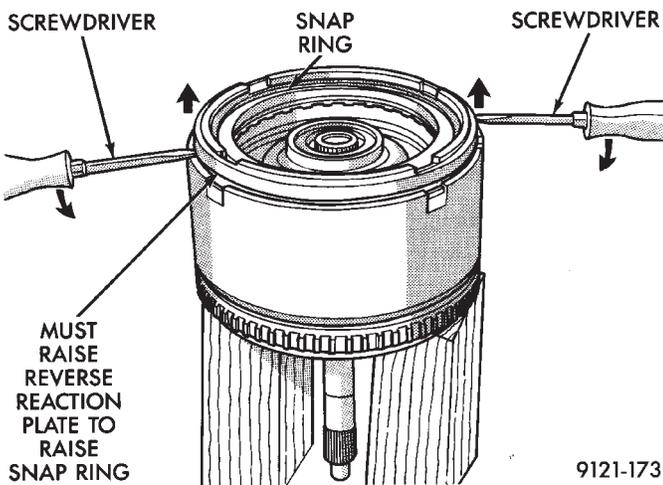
Seating Snap Ring to Determine Reverse Clutch Clearance
